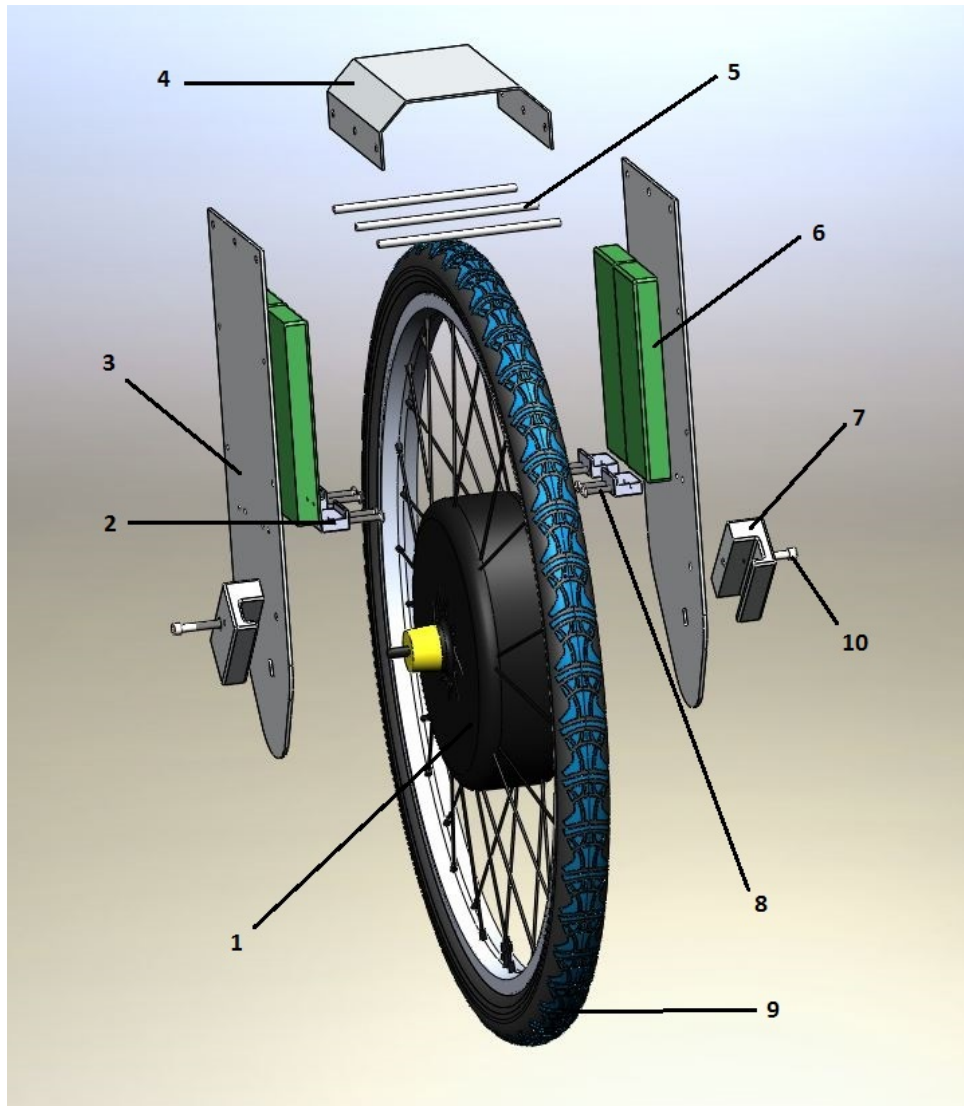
Exploded View of Might-E Wheel and Part Identification
